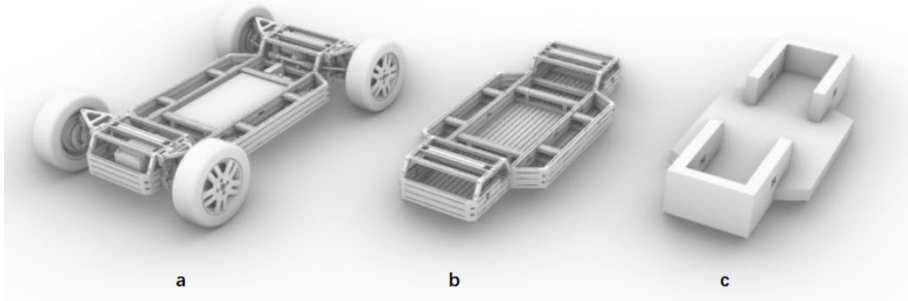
(a) The chassis with components; (b) The basic chassis structure; (c) Design domain of the chassis
